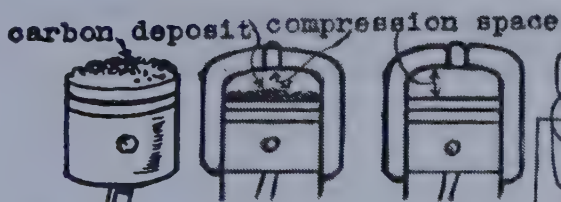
Poor grade of oil will burn and leave carbon deposit (soot) on end of piston and thereby increase compression space and cause pounding. Will also cause "pre-mature" ignition.
